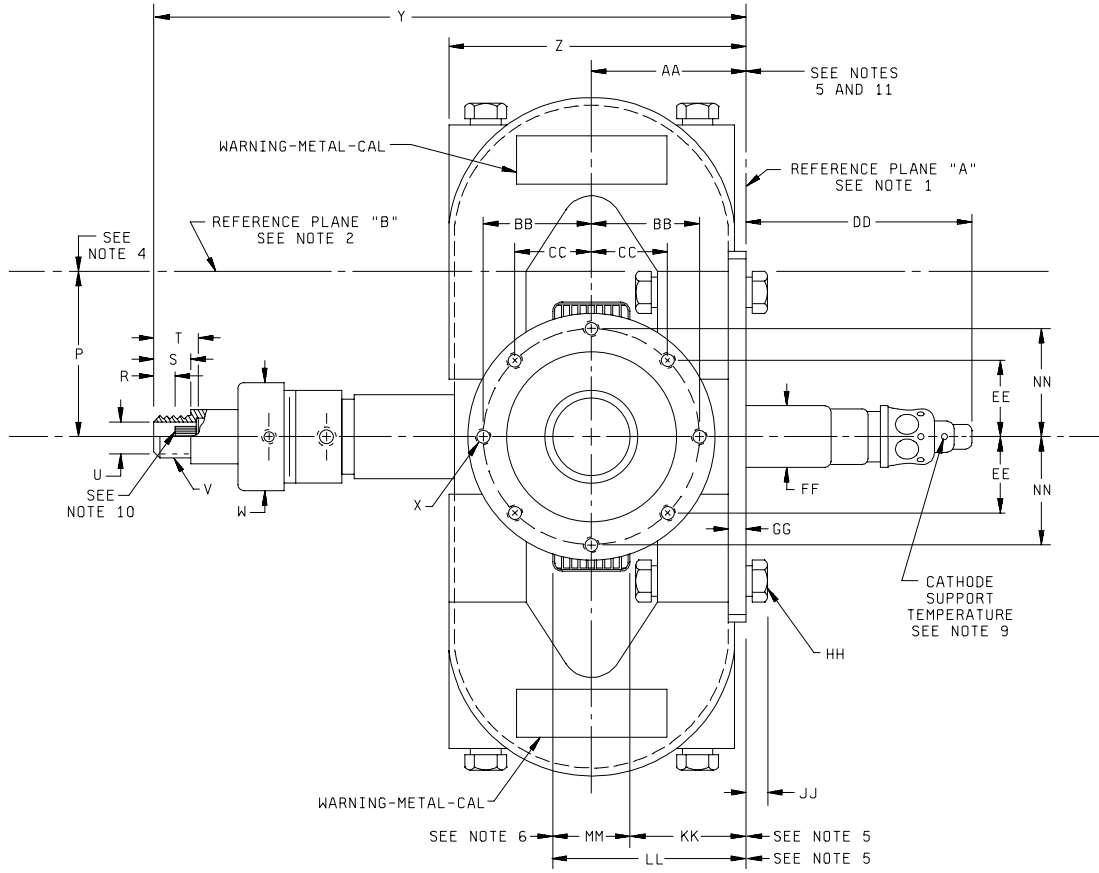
Outline dimensions of tube type 6344A. -Continued.
